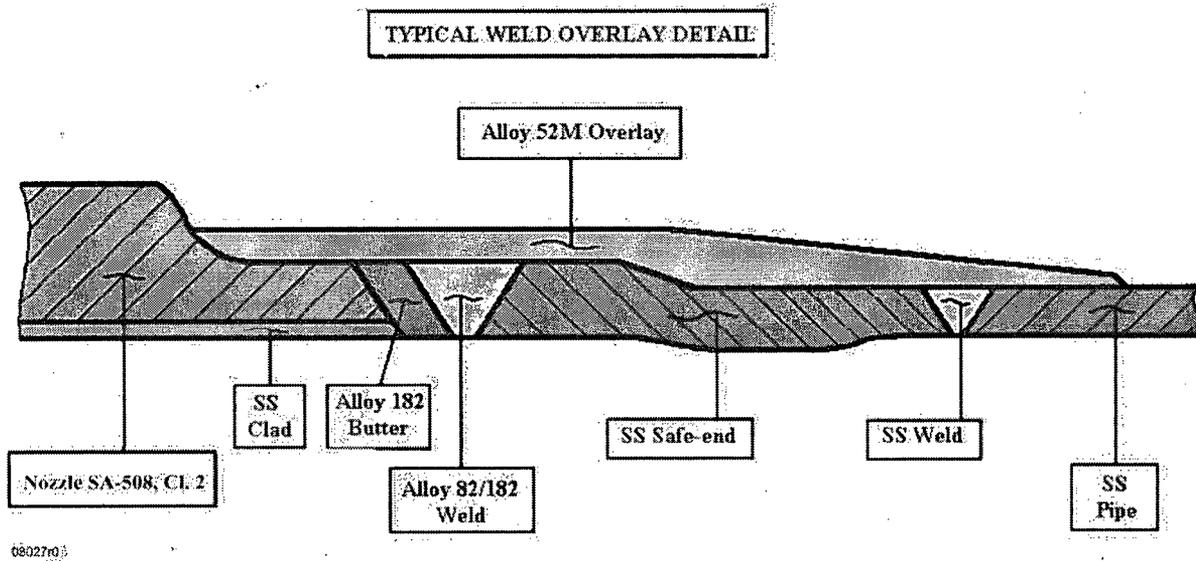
Illustration of Typical Weld Overlay Design
